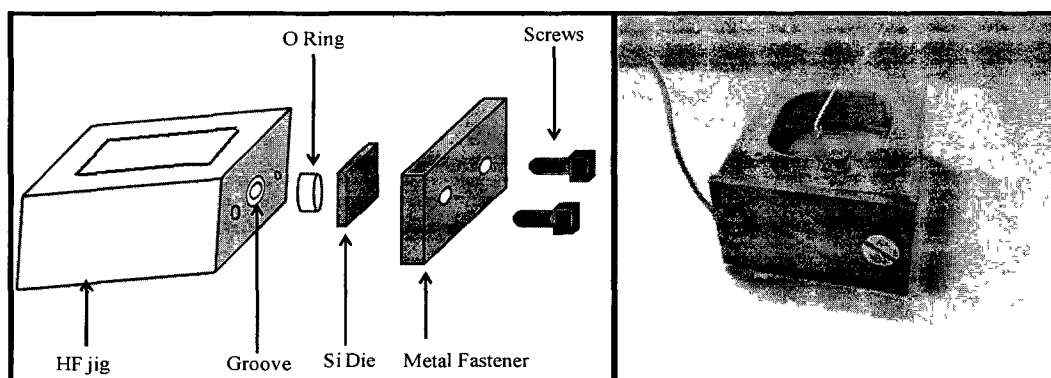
Schematic of the assembly of etching setup and the actual jig
